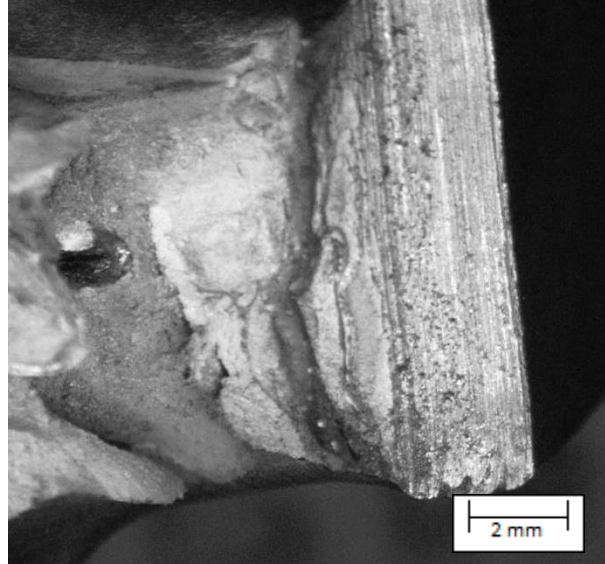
Stereoscopic image of the fracture surface of the weld of sample 1 (Heat treated for 579h at 635°C prior to welding and a 672h PWHT at 635°C).
